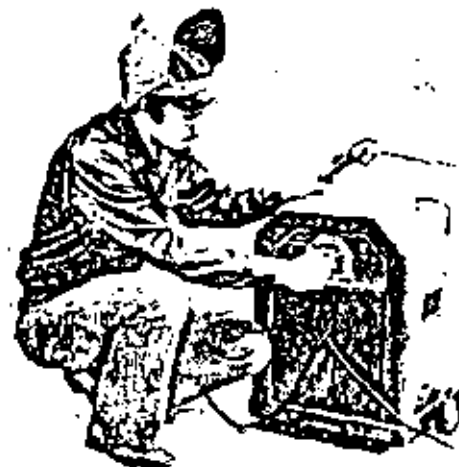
A typical small AC transformer welder for light-duty and limited service welding.
